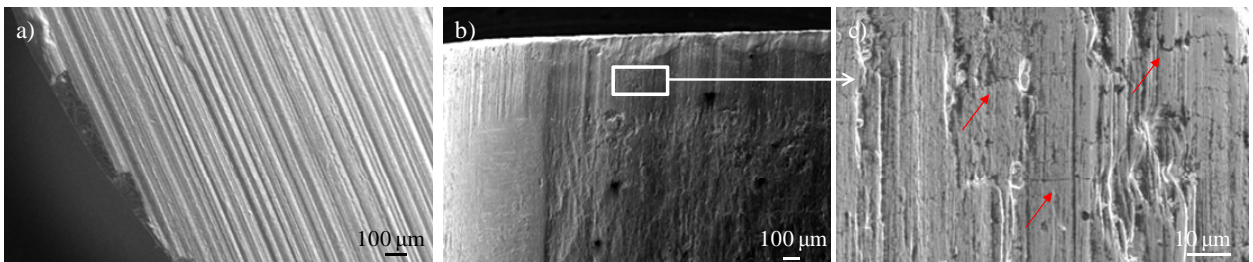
a) Chipping of 1.2379 A punch along the machining grooves after 31000 strokes; b) wear at the flank face of the punch after 31000 strokes and c) cracks at the flank face of the punch after 31000 strokes
